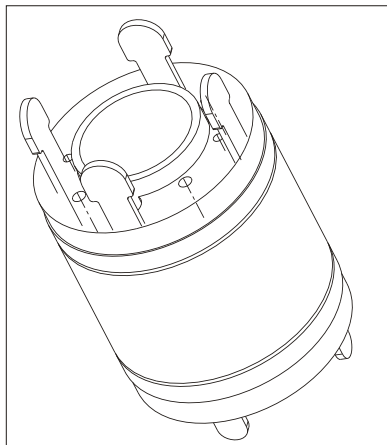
Inserting 1-5 mm thick strips (old 12" hacksaw blades)
